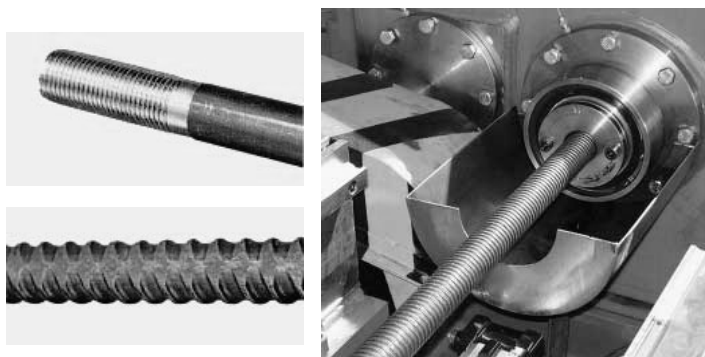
Upper left: End-threaded smooth bar; Lower left: Threadbar® ©Dywidag; Right: Threading of a Freyssibar® ©Freyssinet
